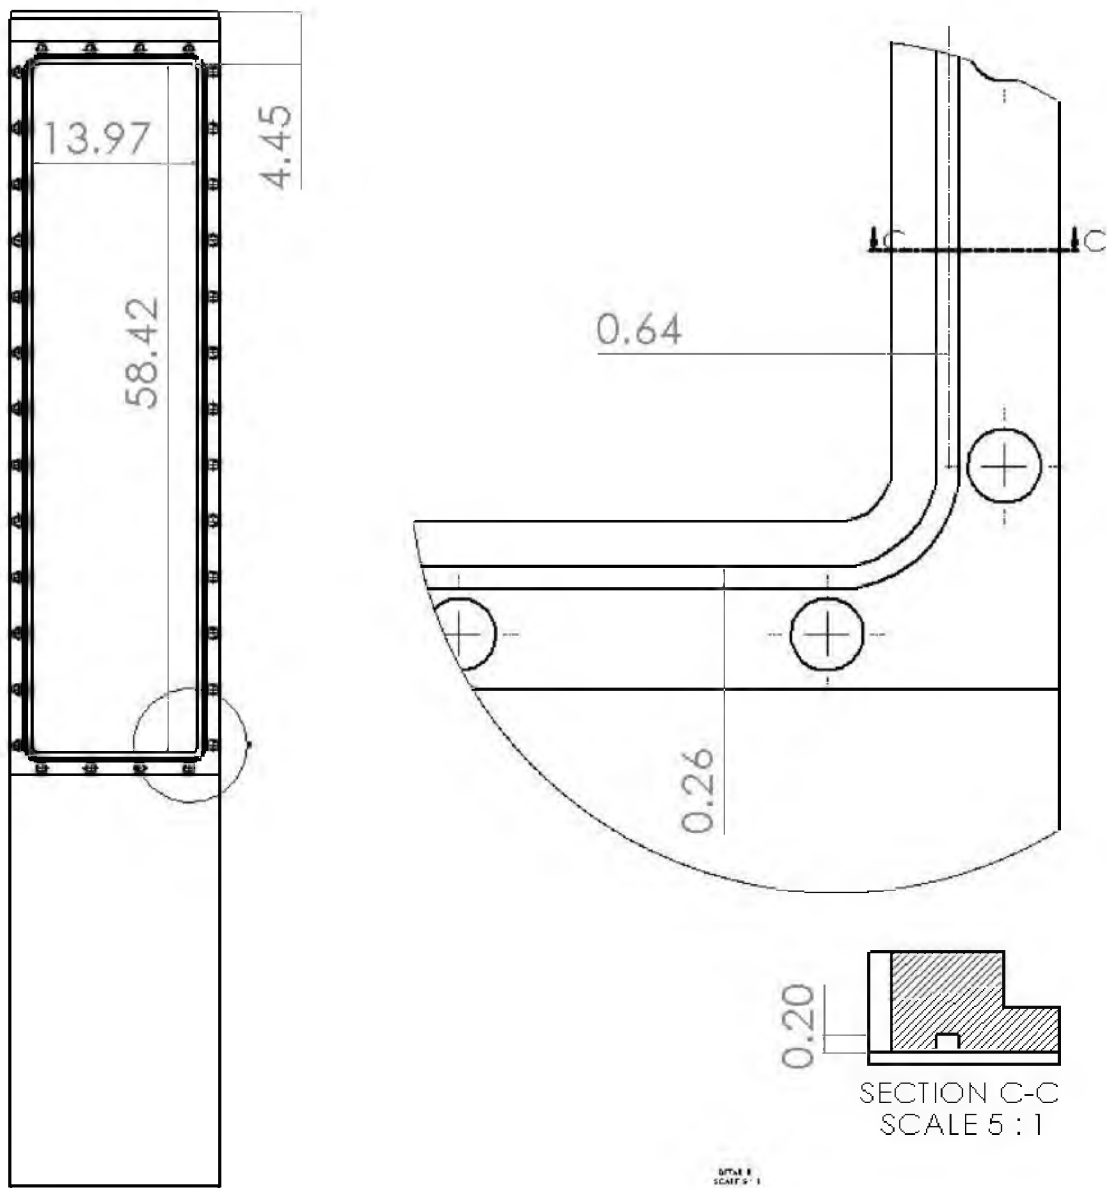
SolidWorks drawing of the top of the test section. a) (left) Full view. b) (right) Cutout view showing the dimensions of the O-ring chord channel.
